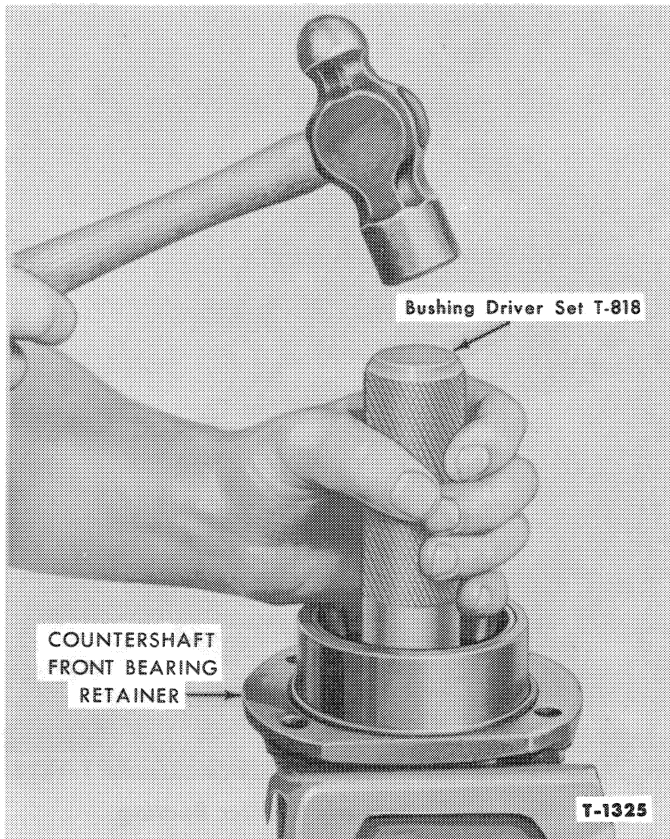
Installing Bushing in Countershaft Front Bearing Retainer
